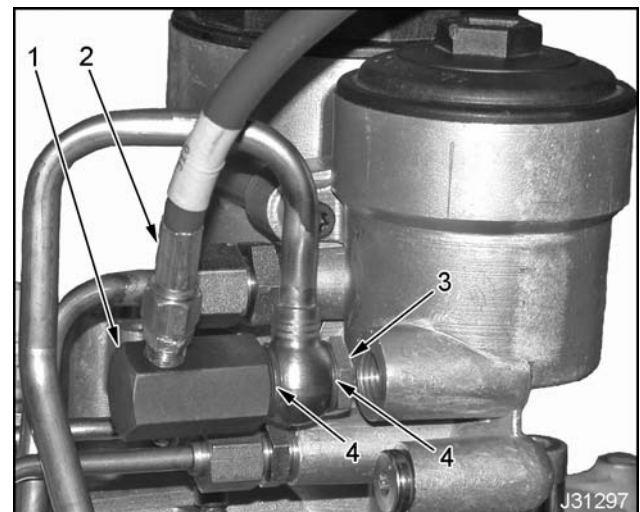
Fuel Pressure Test Adapter installed in fuel supply from fuel pump
